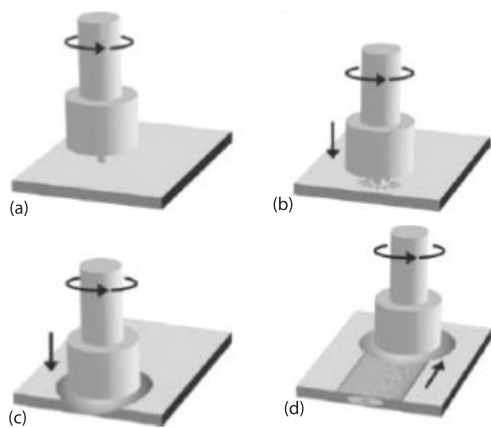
Sketch of FSW welding; (a) before contact, (b) tool pin in contact with plates, (c) tool shoulder in contact with plates, and (d) production of welded joint [7]
